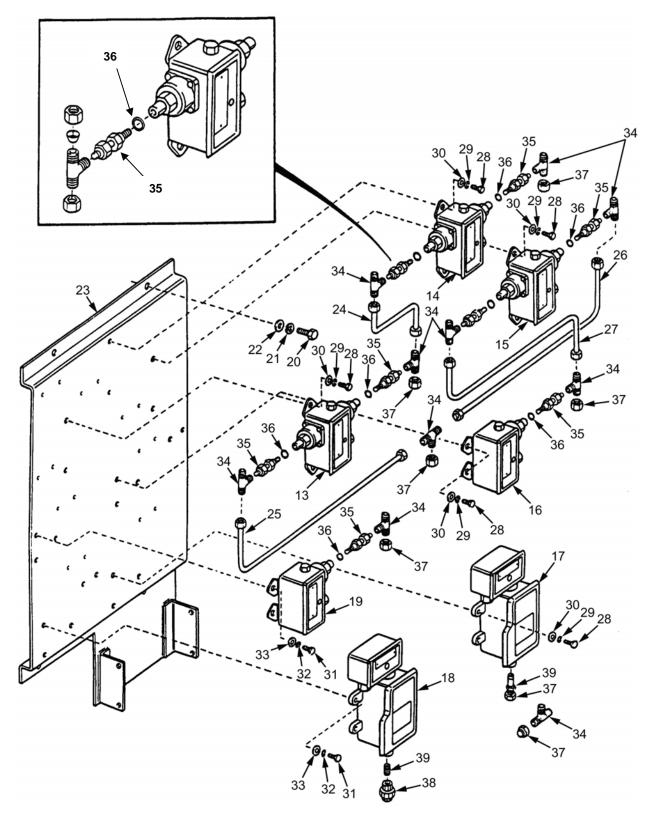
Pressure Switch Panel Assembly. (Model WTA-060 Only)
